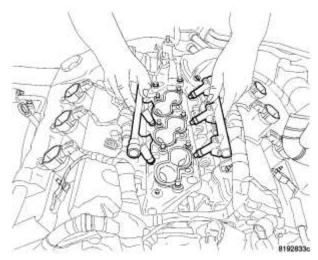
Removal/Installation Fuel Rail Courtesy of CHRYSLER LLC
